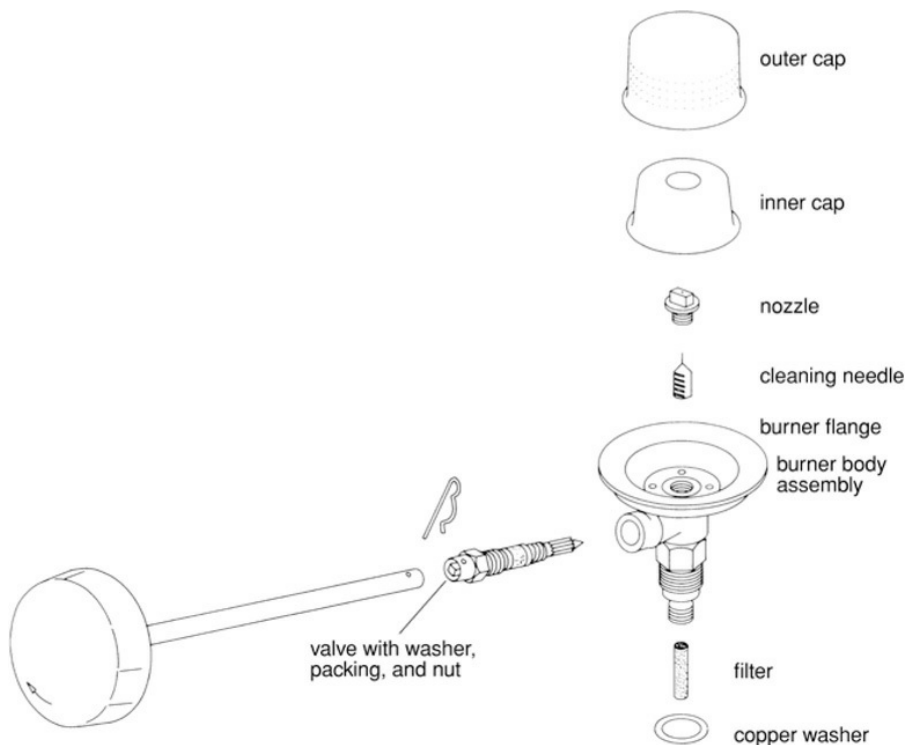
B. An exploded view of an alcohol burner. (Kenyon Marine and
